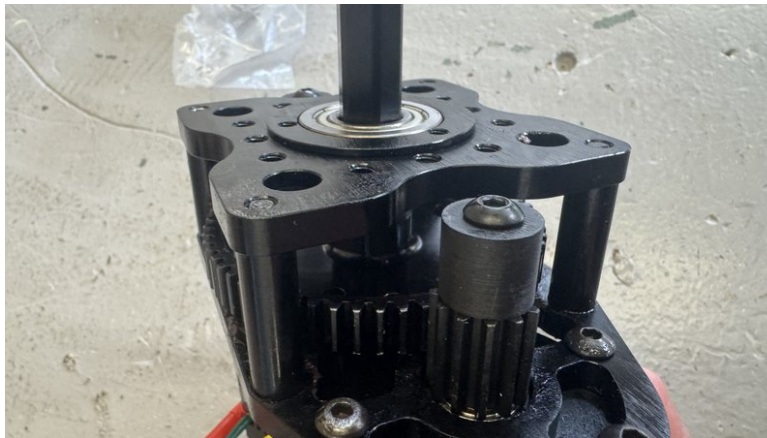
WCP single-stage gearbox, output-shaft side. The shared 60T output gear drives the common shaft; the 24T chain sprocket mounts at right for the 24 : 55 chain stage.
